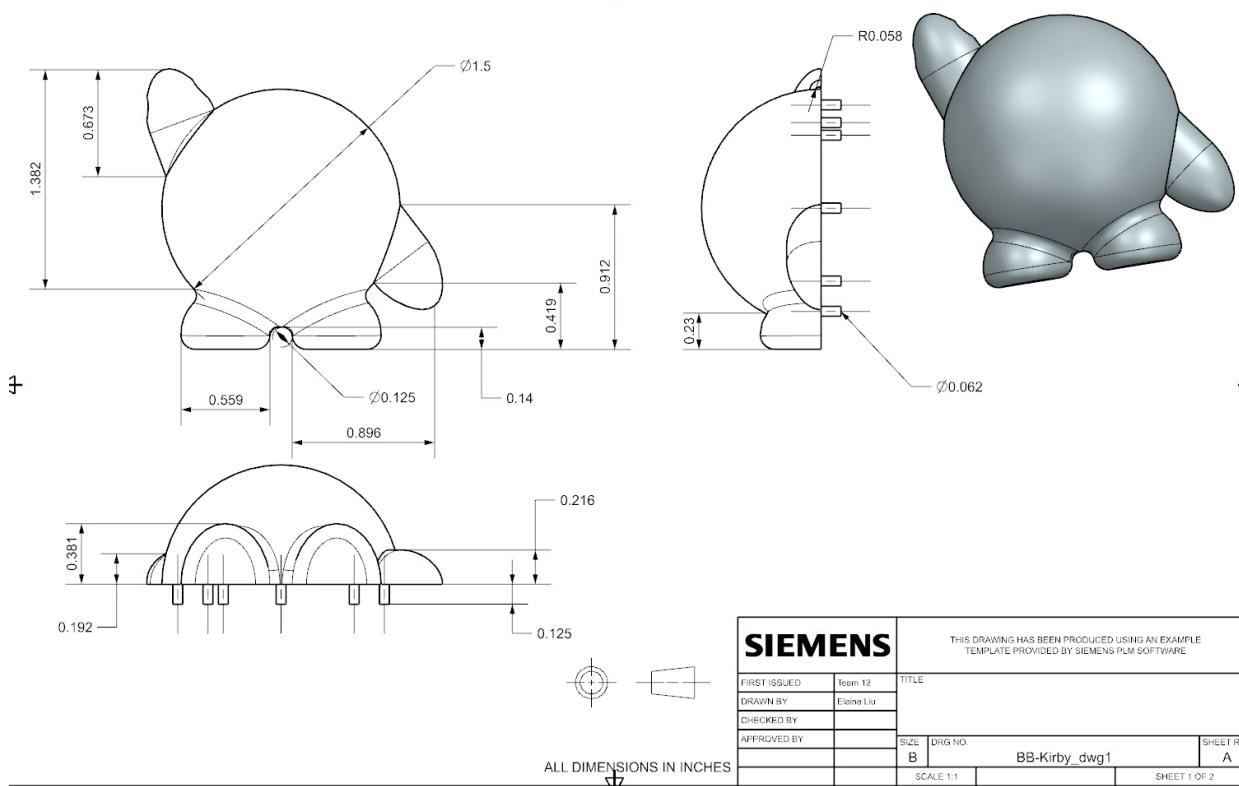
Dimensioned CAD Drawing of Kirby's Back (Sheet 1/2)
